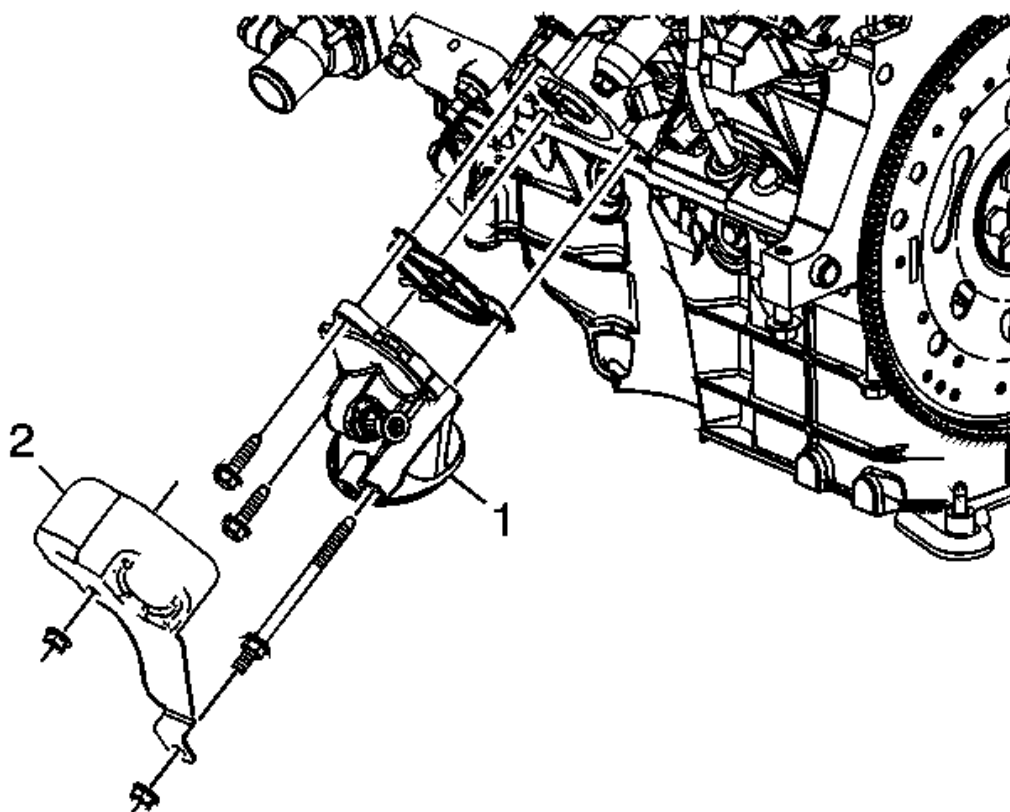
Identifying Oil Filter Adapter & Heat Shield
